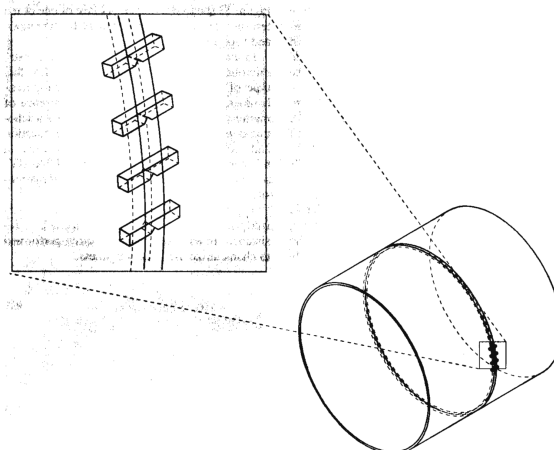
CTOD specimens orientation for fracture toughness testing of welds on X70 pipes 14.2 mm thick
